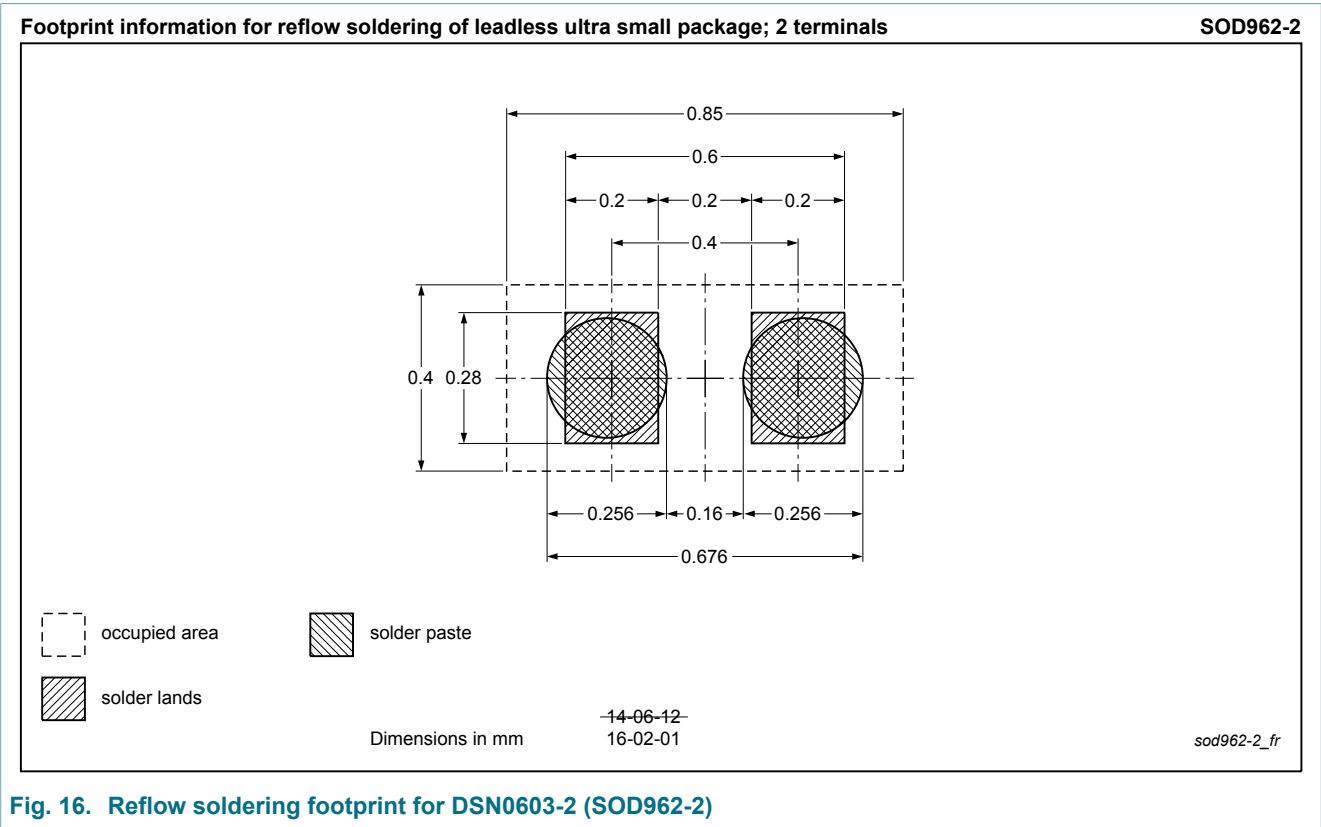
Reflow soldering footprint for DSN0603-2 (SOD962-2)
